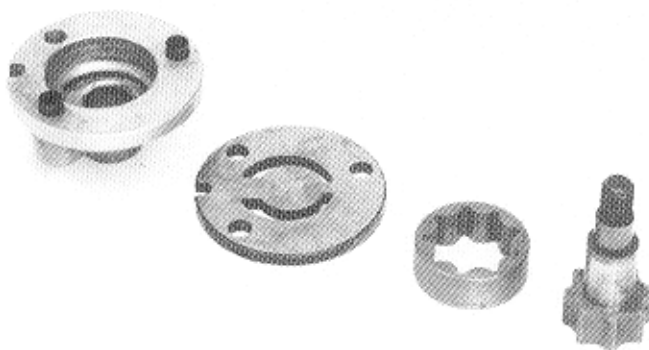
Dismantled Rotary Oil Pump Single-Cylinder Engines
